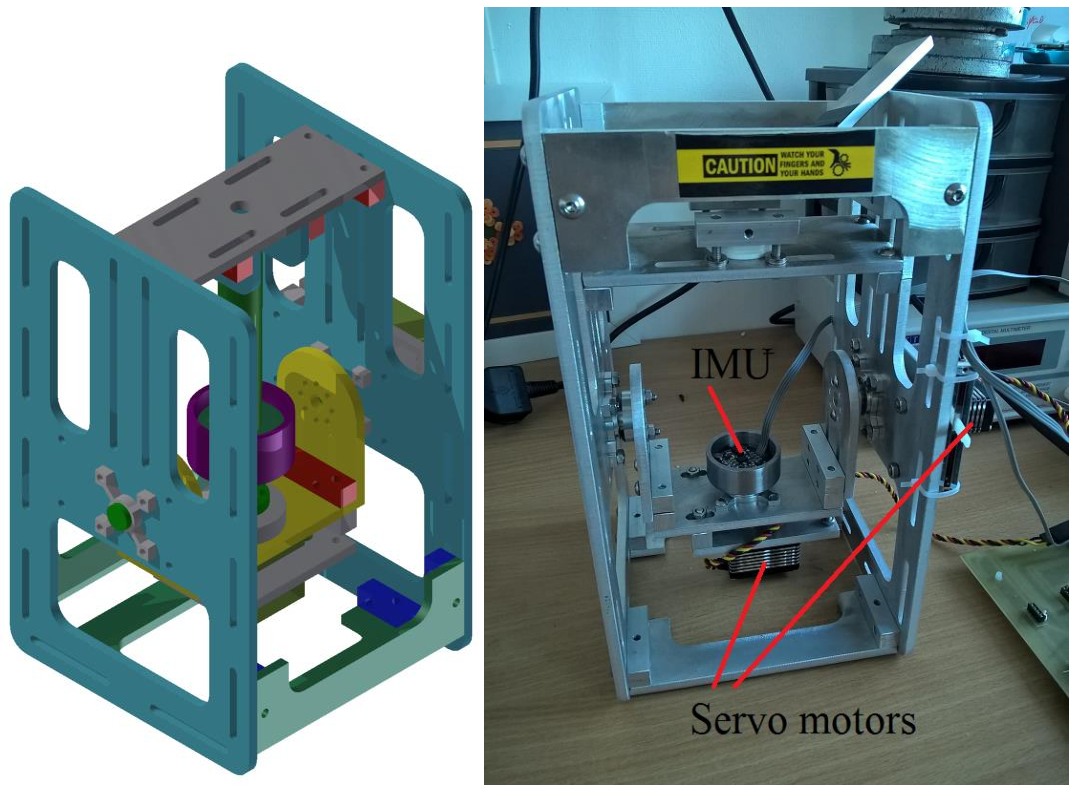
Left: Technical drawing; Right: Gimbal test rig setup
